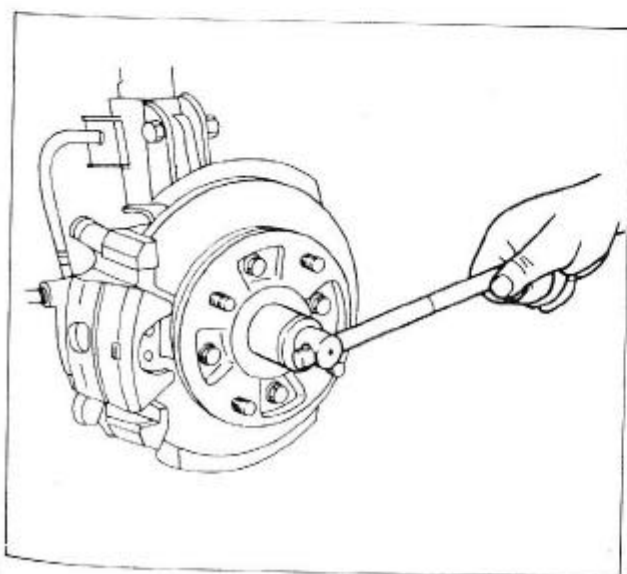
D — 22 INSTALLING DRIVE SHAFT NUT
